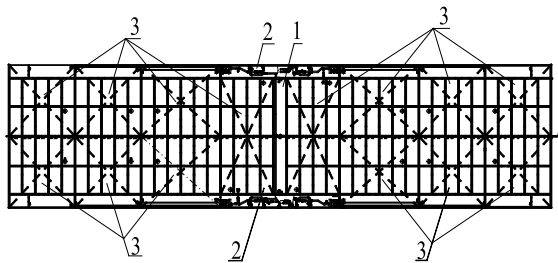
Structure of the composite framing-free pontoon of a dock: 1 – tunnel 2 – dry compartments, 3 – ballast compartment [14]
